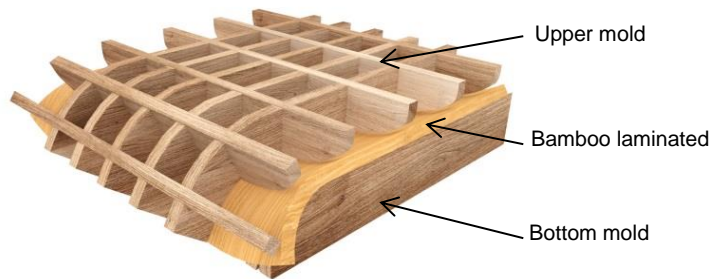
Pressing Process of the laminated bamboo material using bottom and upper press mold
